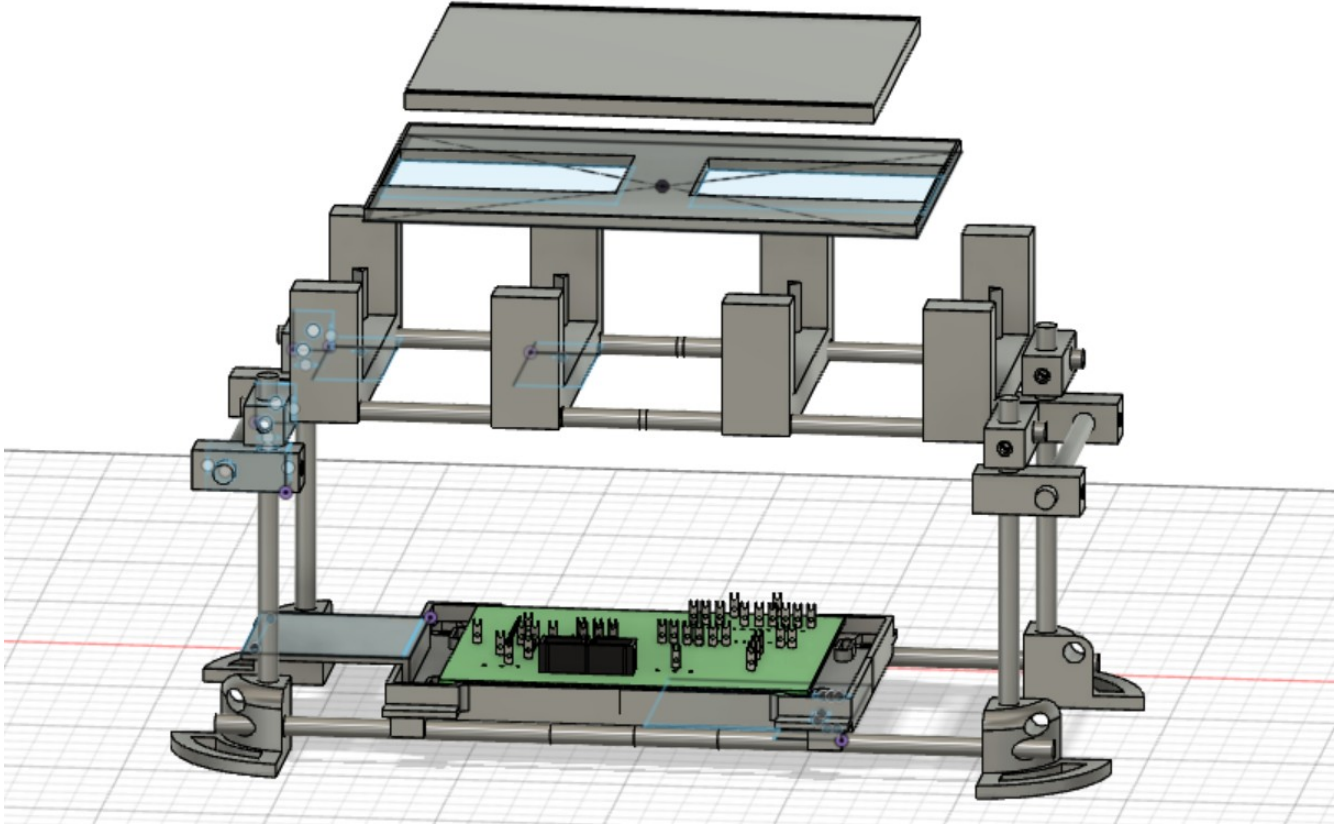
Schematic of the parts of device (view by Fusion 360°). The PCB, with connection pins for the temperature control modules, is shown bolted on the fully assembled frame.
